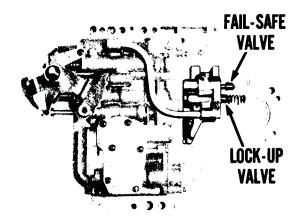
Both these valves must switch before "switch" valve will operate.
